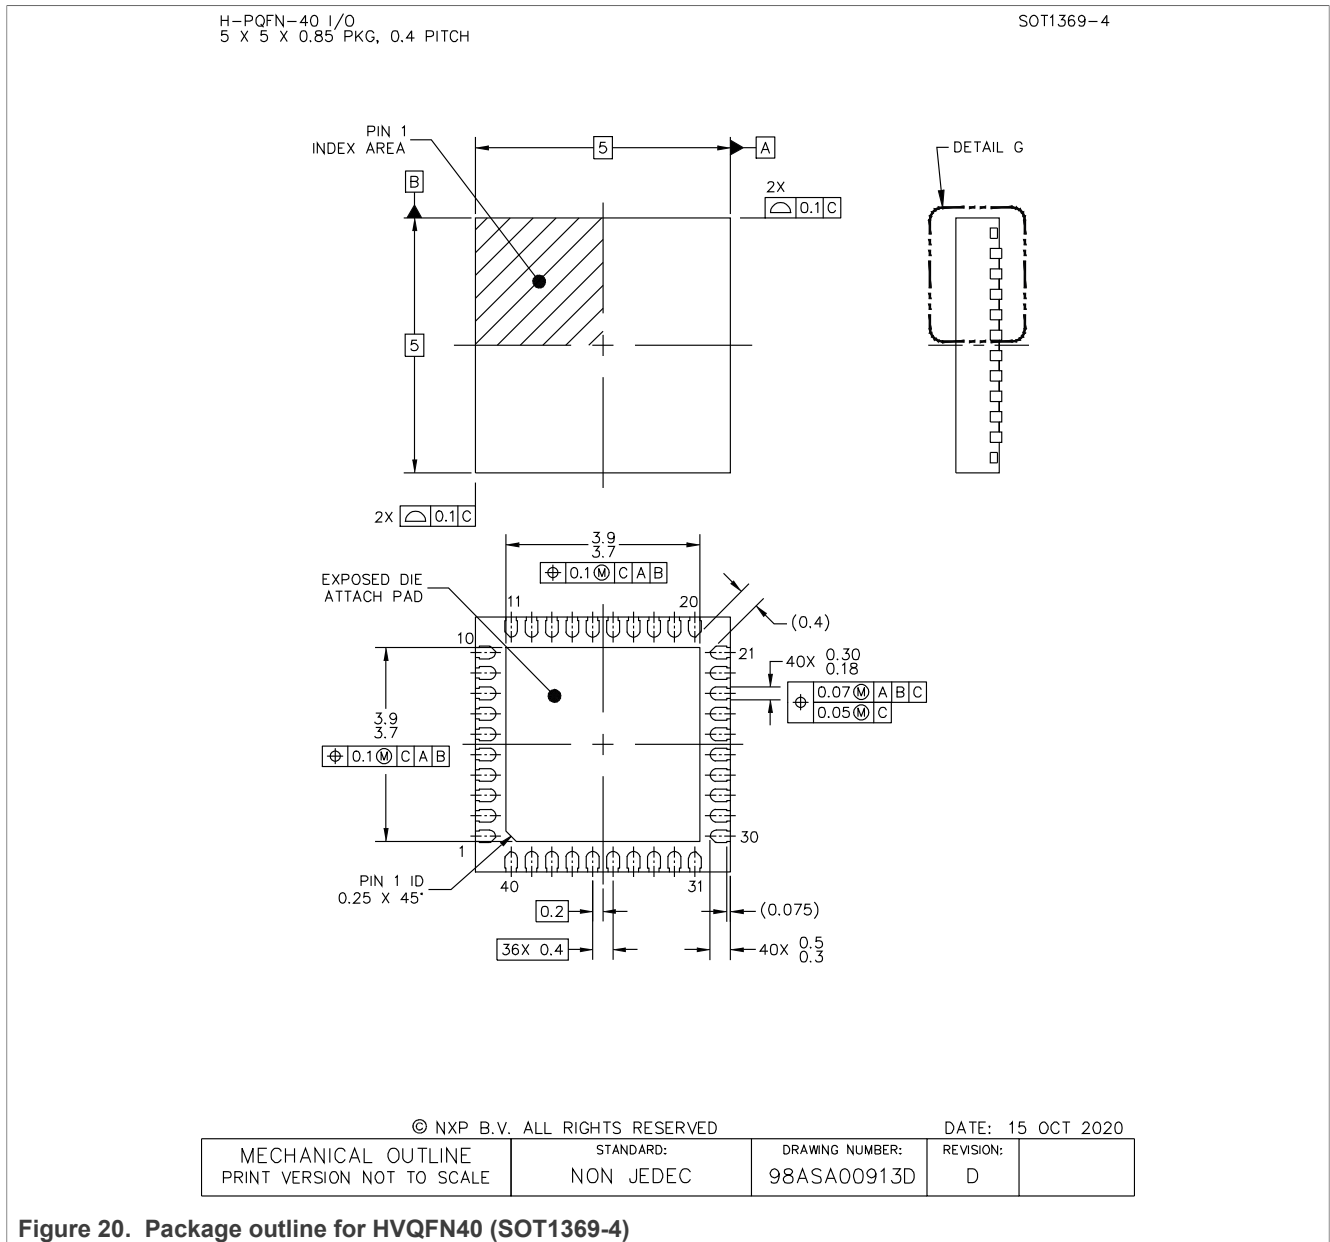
Package outline for HVQFN40 (SOT1369-4)
